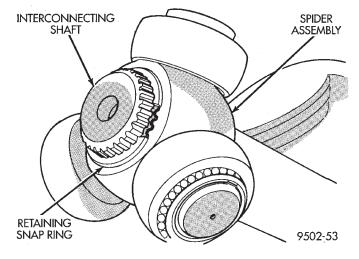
Spider Assembly Retaining Snap Ring Installed
